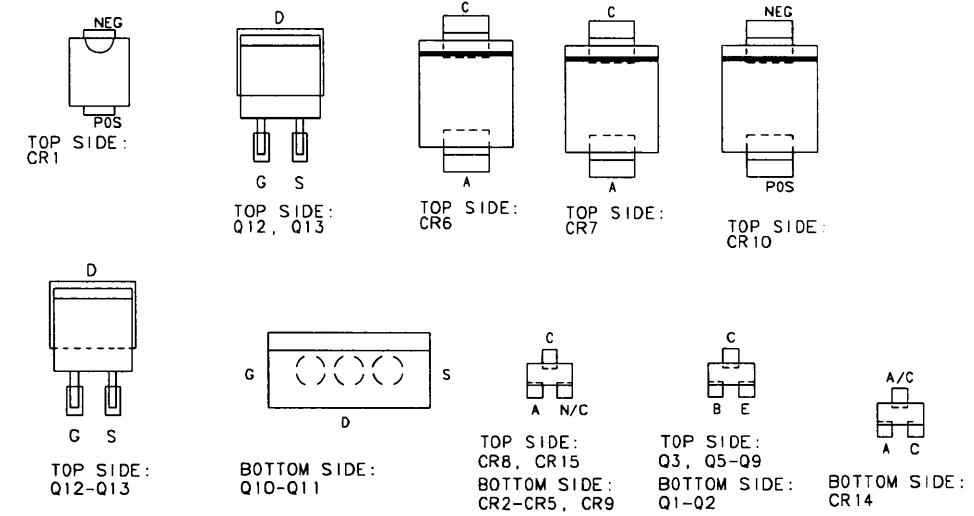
SERVO BOARD ASSEMBLY DWG 300-09835-01
